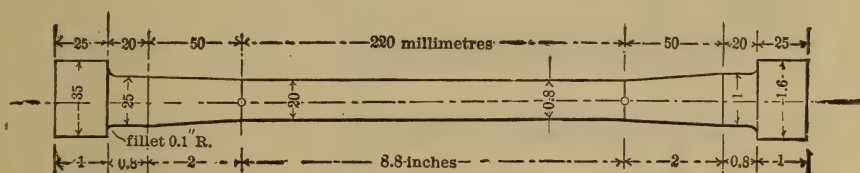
STANDARD TEST-PIECE IN TENSION.
